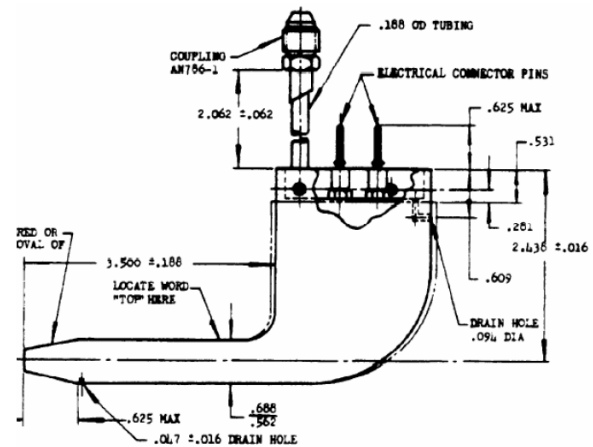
b. Technical drawing of the Pitot tube (source: AeroInstruments Co., USA).
